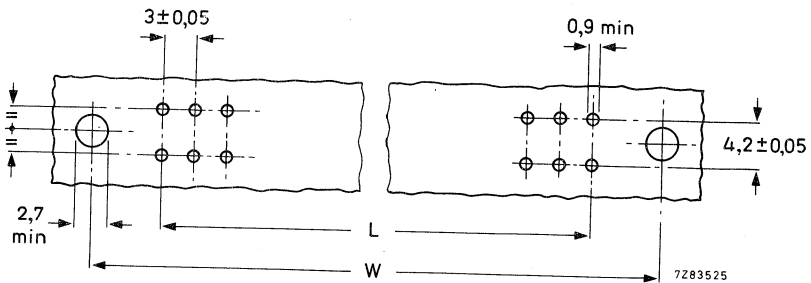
Hole pattern for a male part with straight dip-solder pins. See Table 6 for dimensions L and W.
